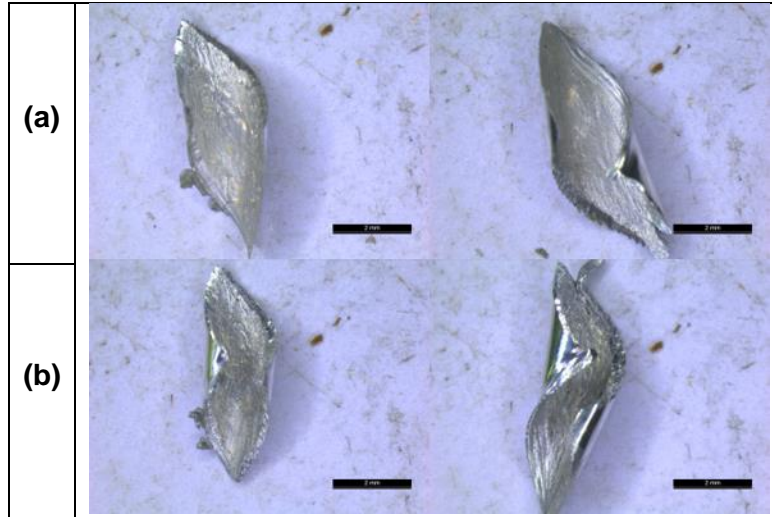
Chips obtained from AL1 R 8 5 end-milling 6082-T6 - (a) chips collected after the first pass, (b) chips collected after the final pass
